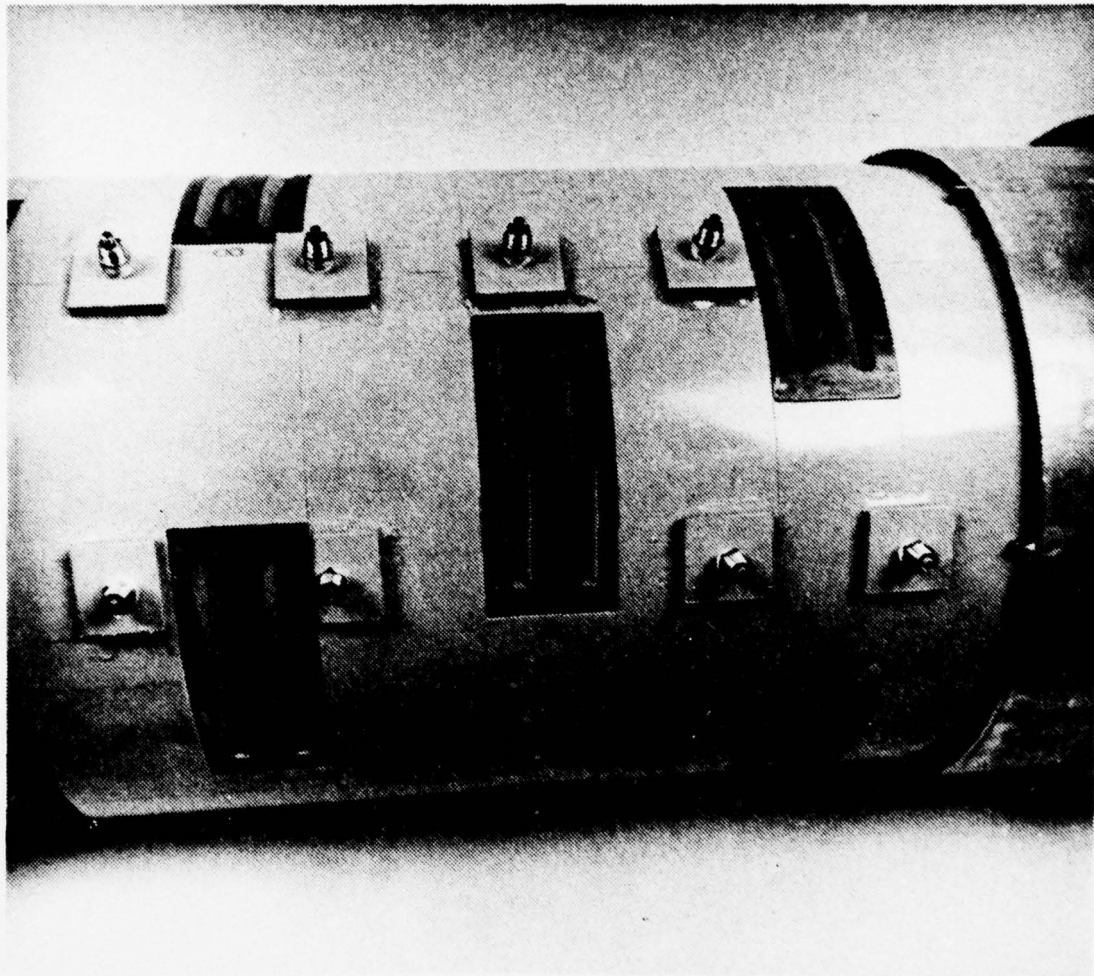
(CONTINUED) DETAILED VIEW OF PORTED INSERT
